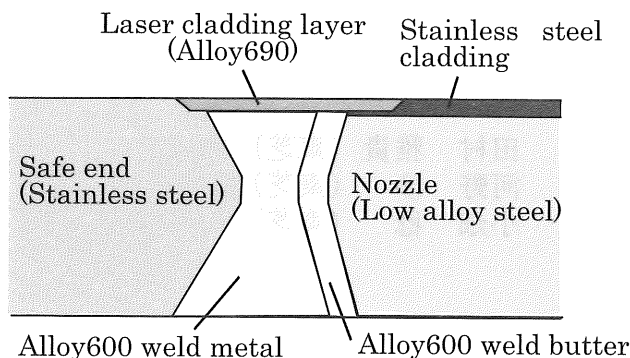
Schematic illustration of cladding layer on dissimilar weld between reactor vessel and safe end
